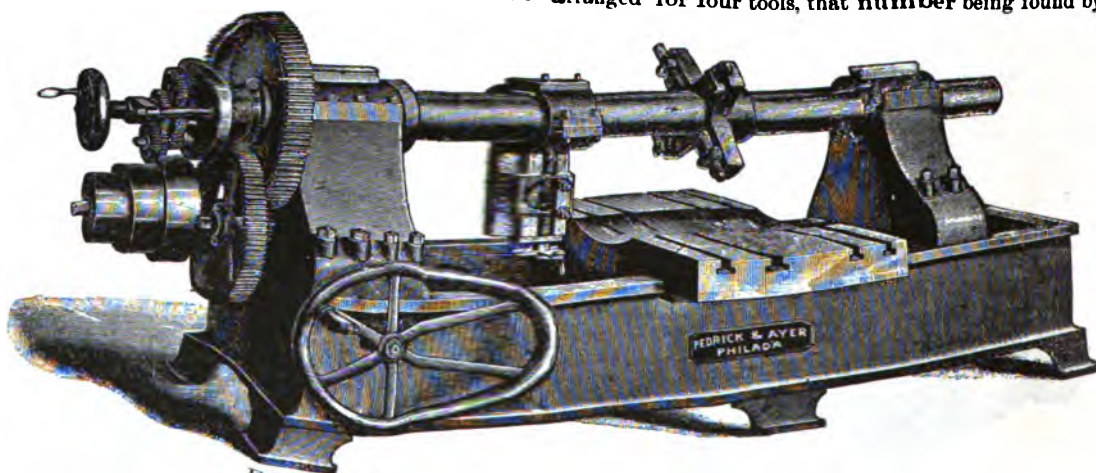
Pedrick &amp; Ayer cylinder boring-machine.
